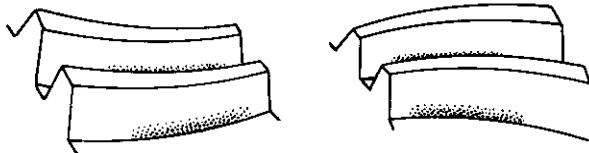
Low Tooth Contact—To Correct Move Pinion Away From Gear
